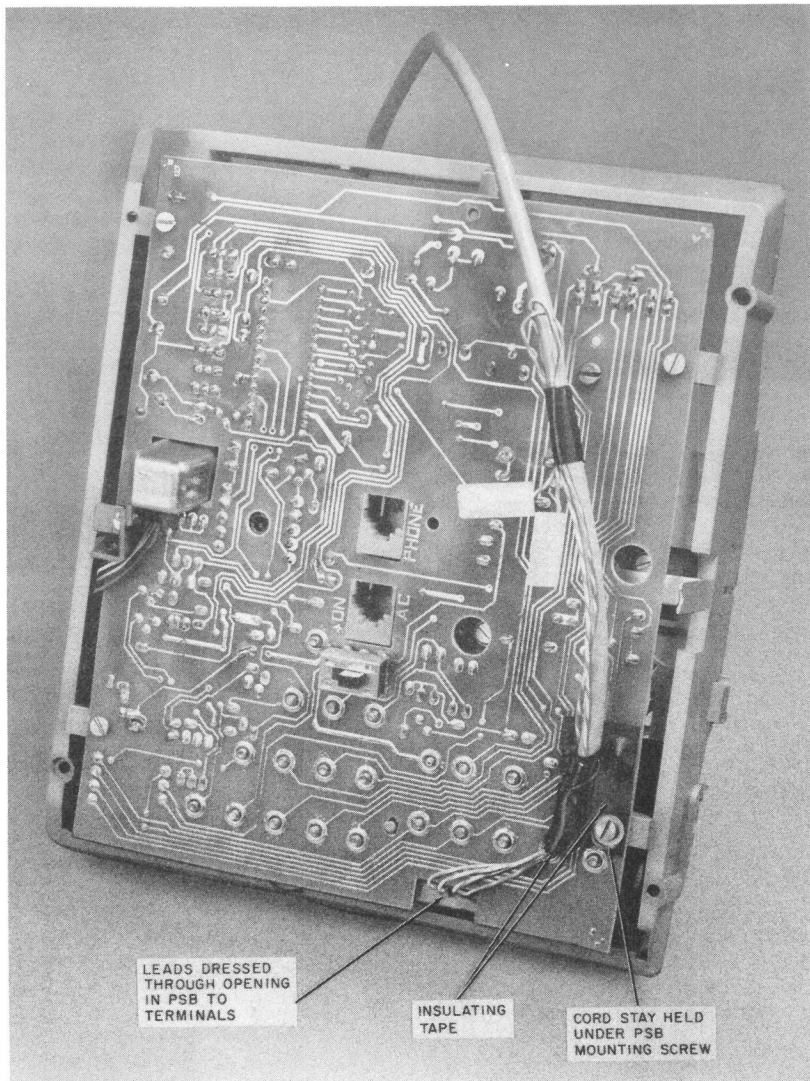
Bottom of Set With Lower Housing Removed Showing an Adjunct Cord Dressed Across Power Supply Board (PSB)
